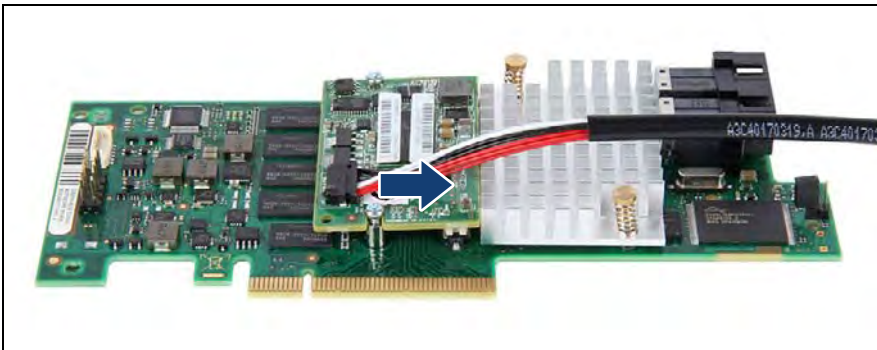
Removing the TFM adapter cable (RAID controller D3216)
